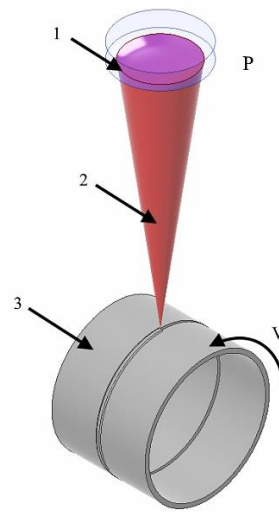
Schematic of laser welding on a precision rotator, where 1 – lens, 2 – laser beam, 3 – workpiece to be welded
